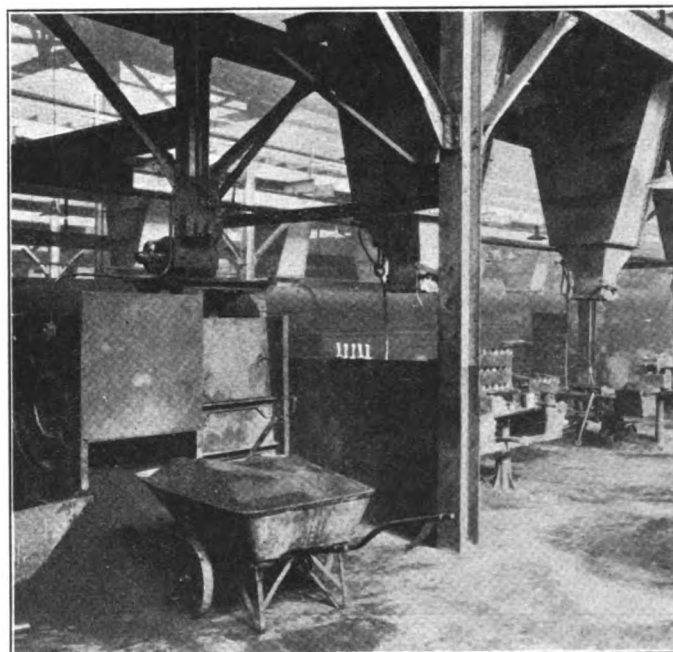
HOPPERS SUPPLYING SAND THAT STILL RETAINS SOME HEAT FROM THE PREVIOUS CASTING TO THE MOLDING MACHINES
